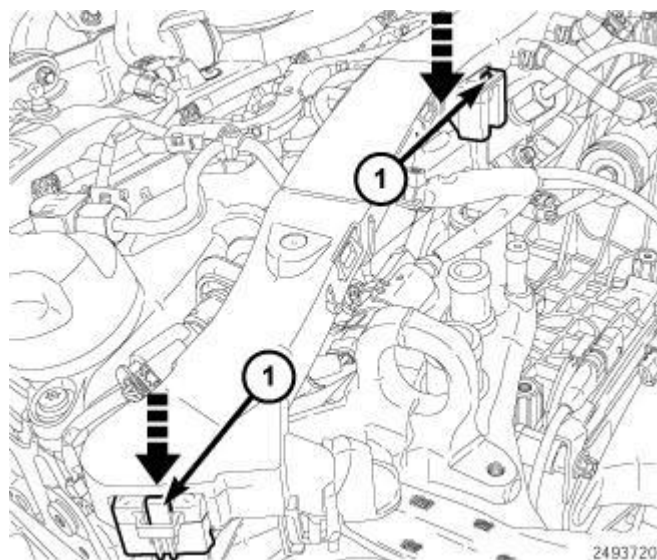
Coolant Temp Sensor & Cooling Manifold Bolts
